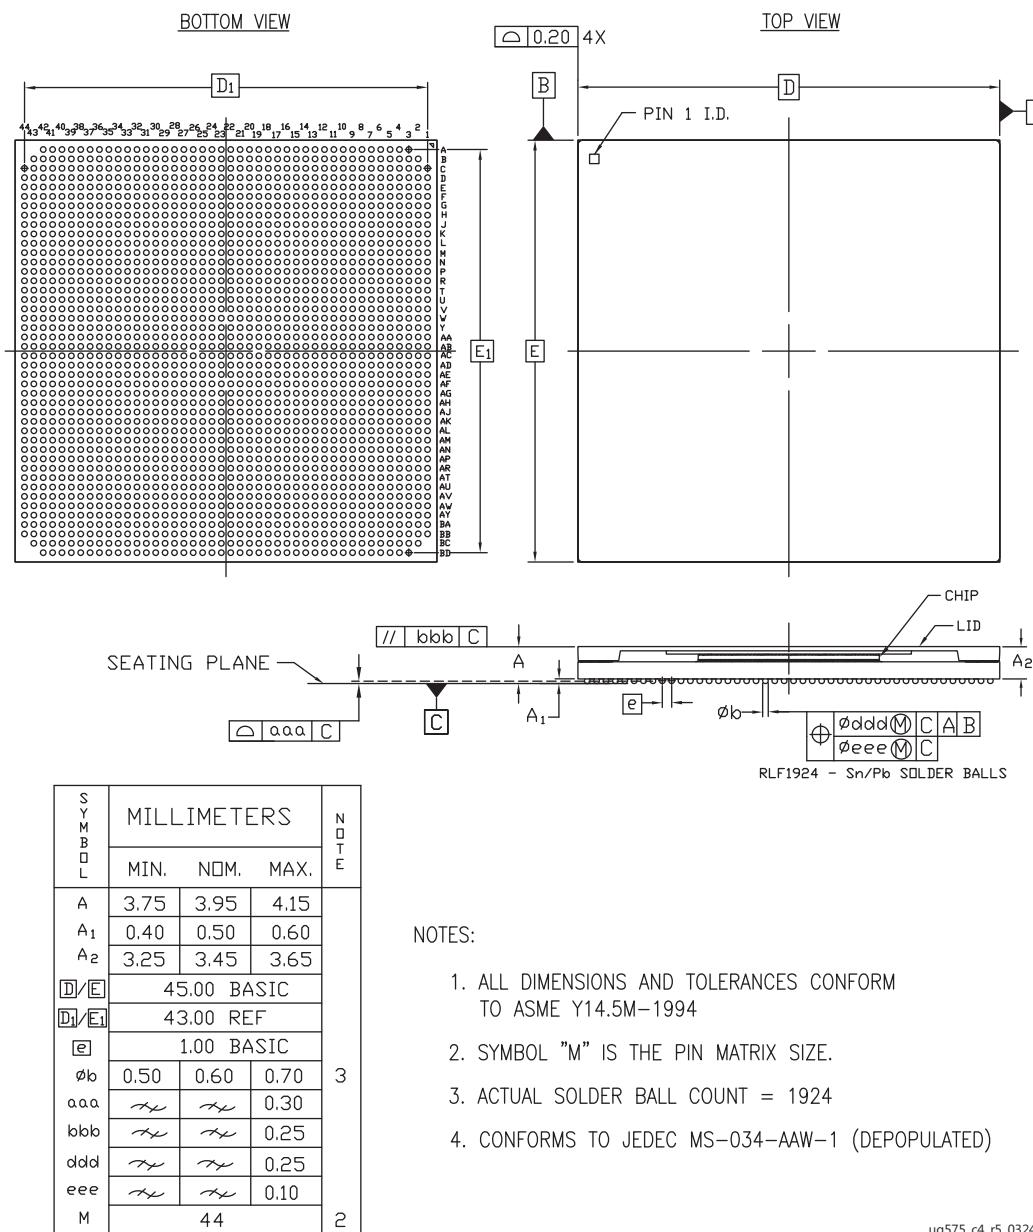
Package Dimensions for RLF1924 (XQKU115)
